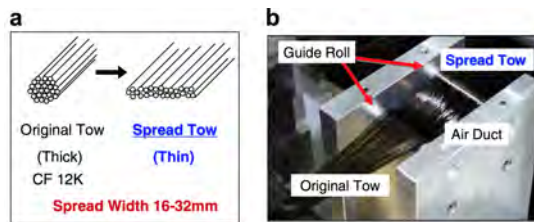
Schematic of the pneumatic tow spreading machine [1].
